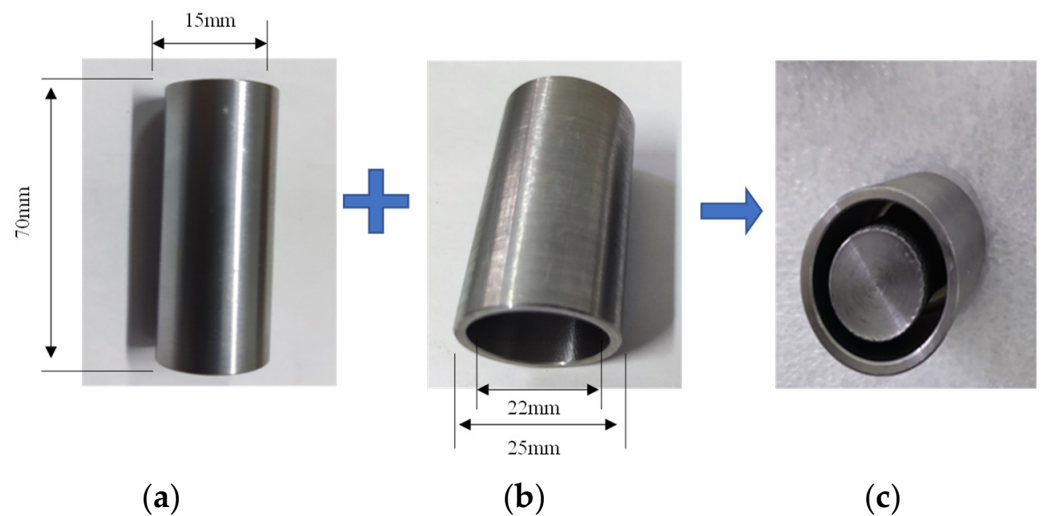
Assembly and dimensions of the model. (a) Solid cylinder. (b) Hollow casing. (c) Annular model.
